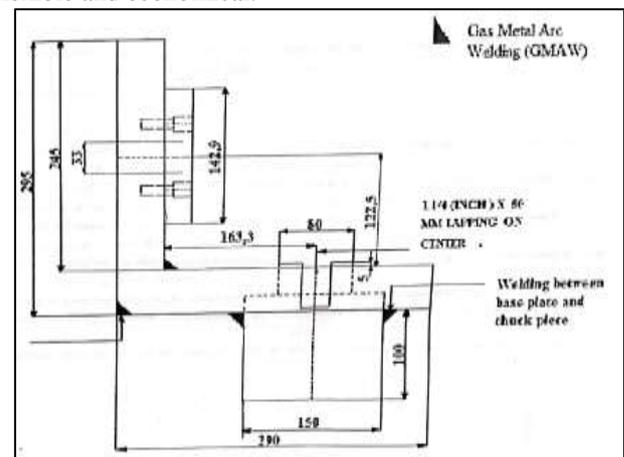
The Chuck Piece welded to Base Plate
